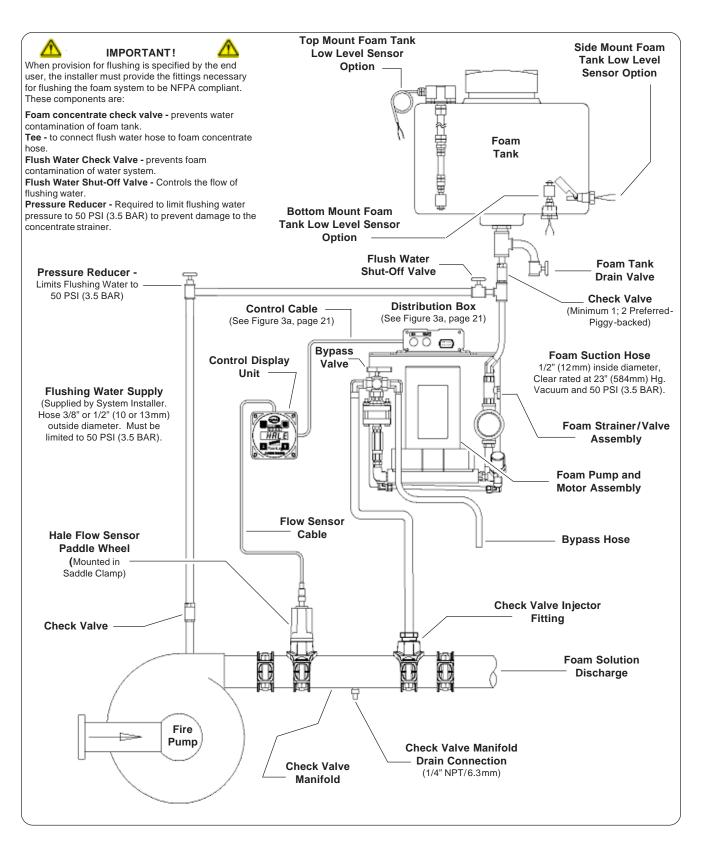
Typical Hale FoamLogix 2.1A System Layout
